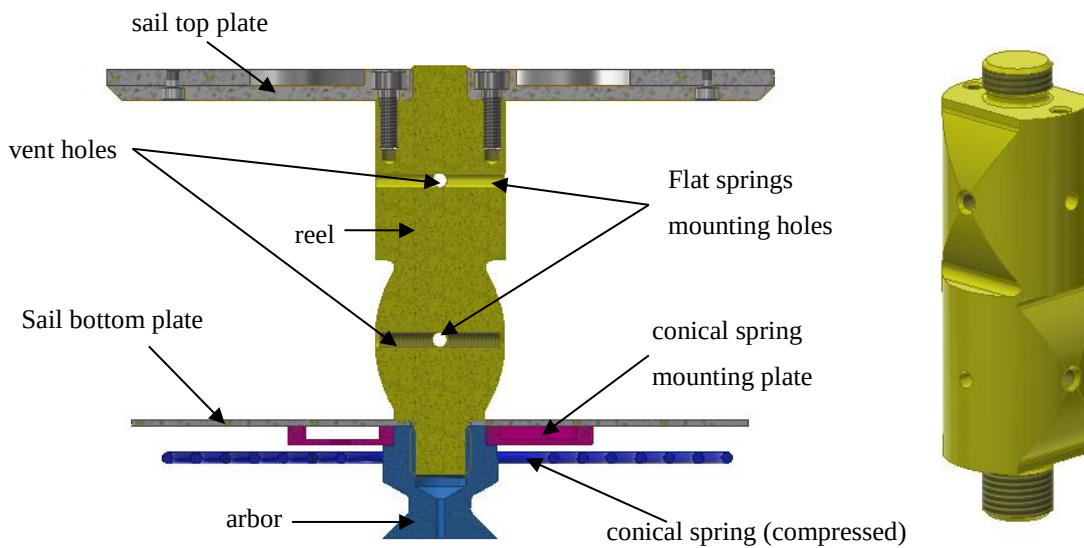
Reel subassembly cross section on the left, sail reel model on the right
